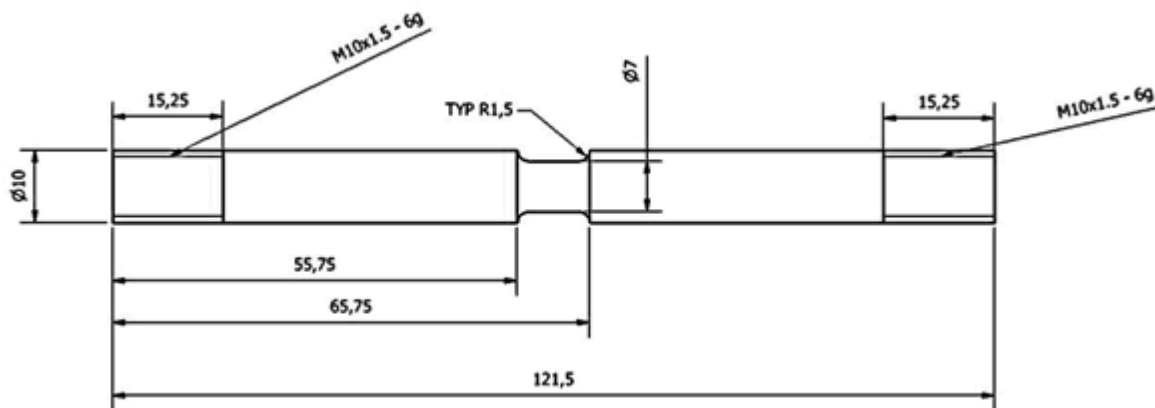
Specifications of the test specimens used for simulated welding and TMF testing. Dimensions in mm.
